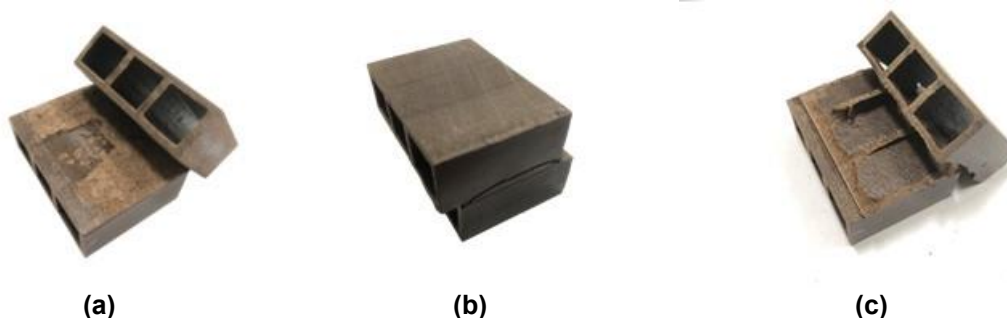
Failure of specimens for bonding test (a) Specimen without sanding (b) Specimen with sanding #120 grit sandpapers and (c) Specimen with sanding #80 grit sandpapers
